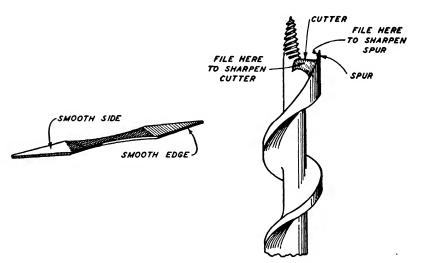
Auger Bit File and Enlarged Detail of Cutter
